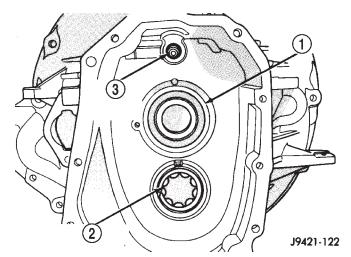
Input Shaft Bearing And Countershaft Front Bearing
